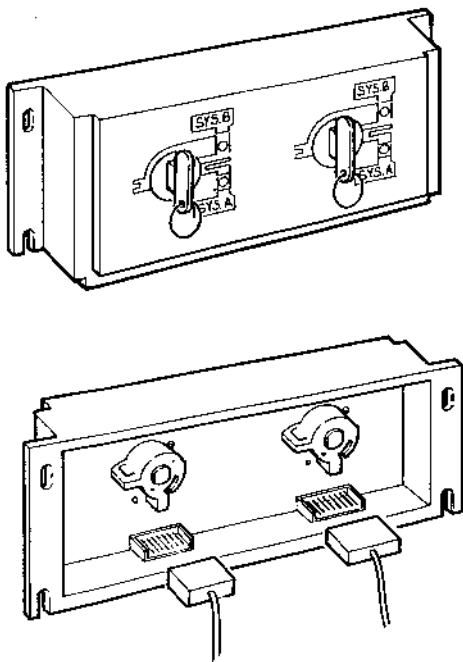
Front and Rear View of the Console in SB1 Cabinet for 2 HDU
